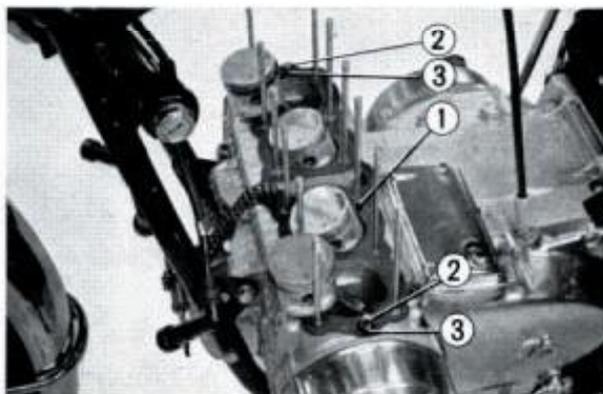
① Cylinder gasket ② Dowel pins ③ O-rings
